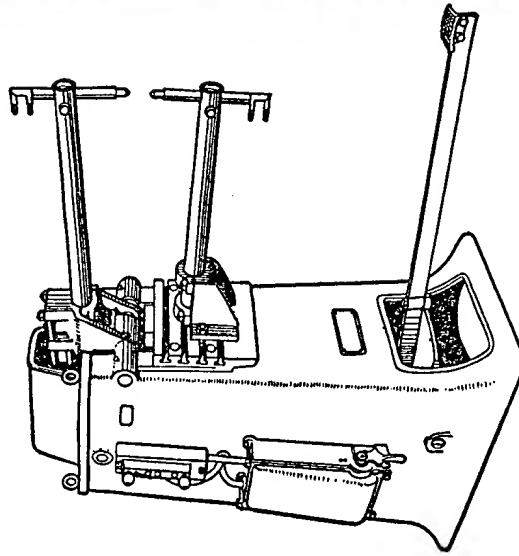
Spot-welding machine. The electrodes are brought together by means of the pedal shown in the foreground.
